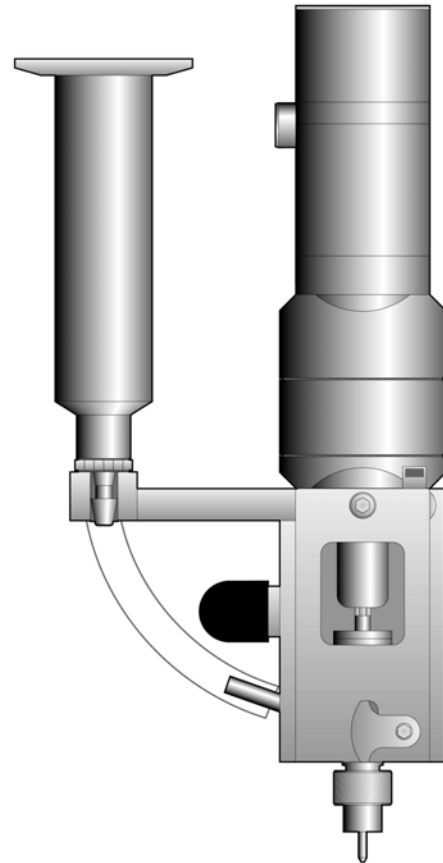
The valve features a rotary auger pump with an encoder for precision. The system is "soft mounted" to the pump housing to prevent material packing.
